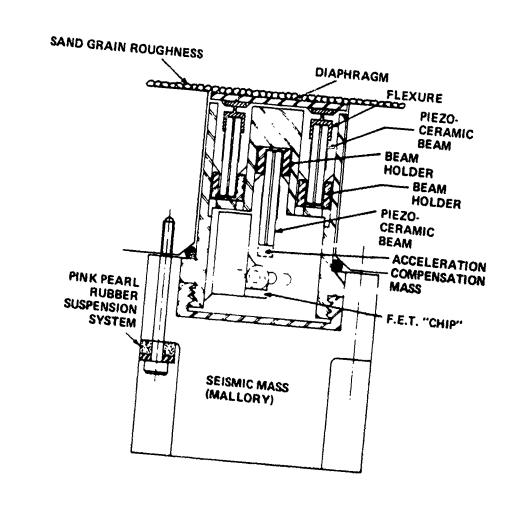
DRAWING OF SECTION THROUGH SKIN FRICTION TRANSDUCER
